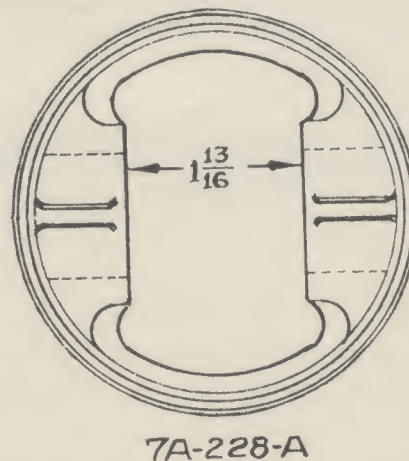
Latest piston for use with latest 7A-119-A crankshaft. Refer also to Fig. 0470.
